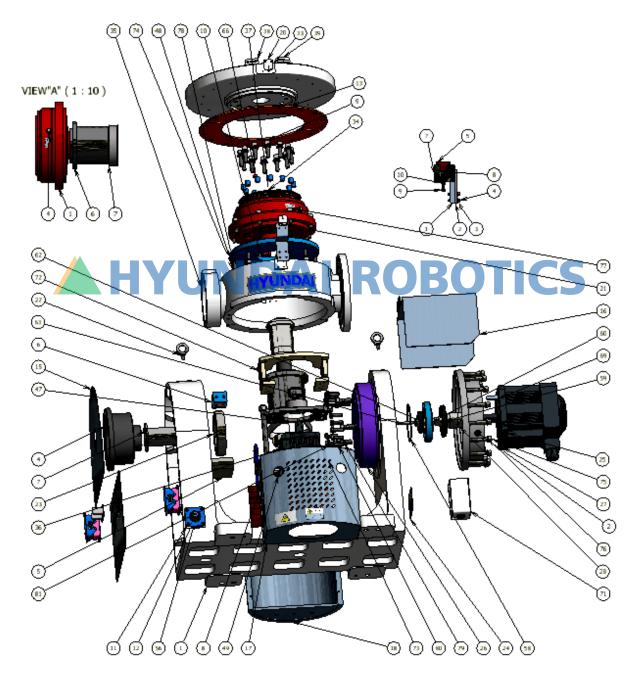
2 Exploded-View Drawing of a Two-Axis Positioner
